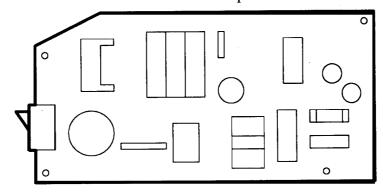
C106 PSB-B/PSE-B Board Component Layout
